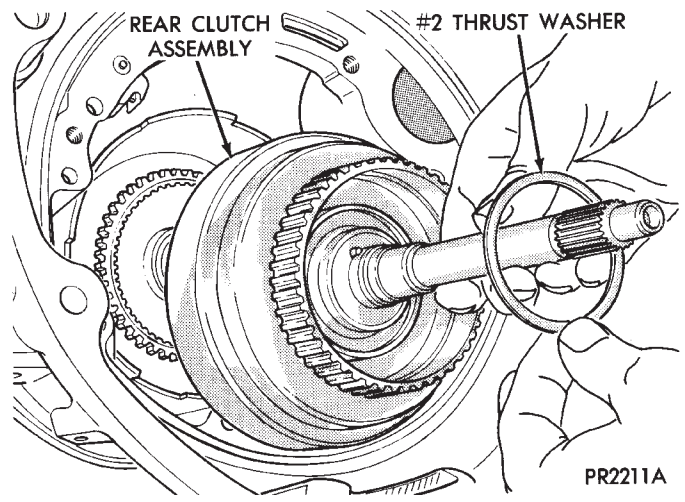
No. 2 Thrust Washer and Rear Clutch
